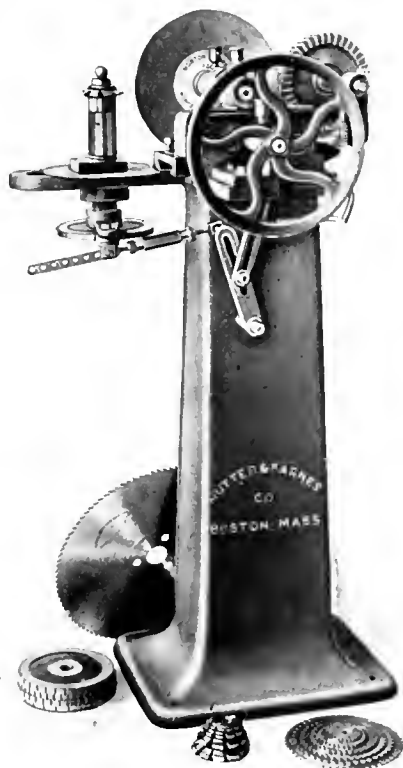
Automatic Saw and Milling Cutter Sharpening Machine.
